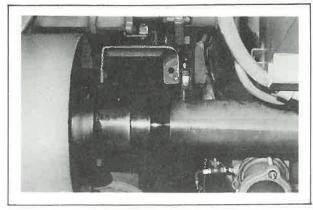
INDICATOR MOUNTED ON ENGINE COUPLING.
